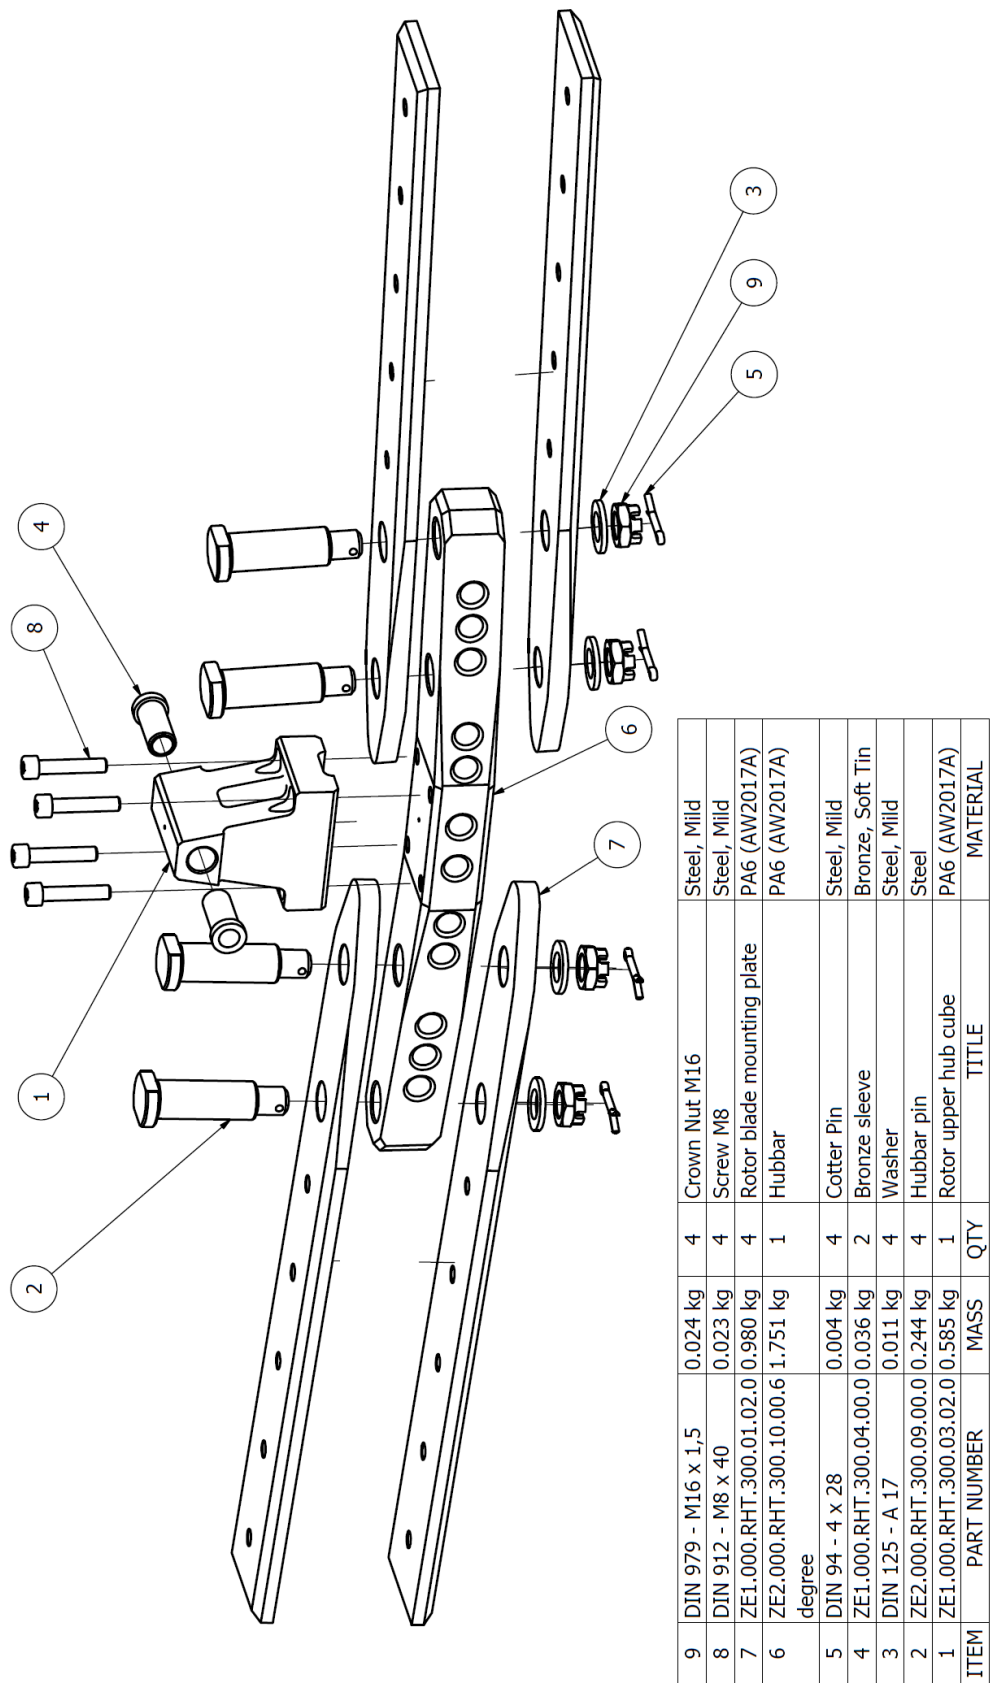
Assembly of the rotor hub (Note: After assembly, the rotor hub cannot be disassembled)
